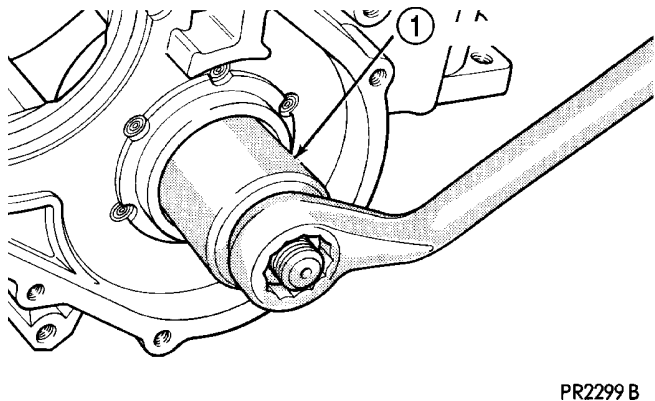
Install Rear Planetary Annulus Gear Bearing Cup
